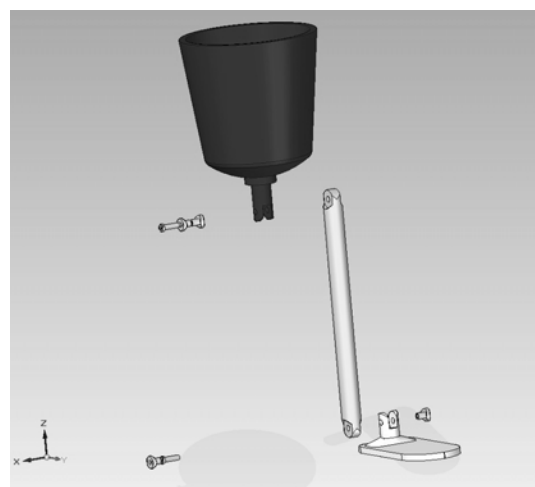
Exploded assembly of the model of the lower limb prosthesis
